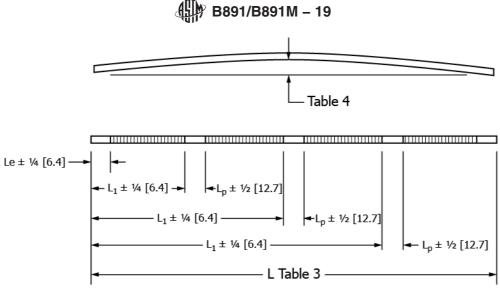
Straight Tube Dimensional Tolerances
